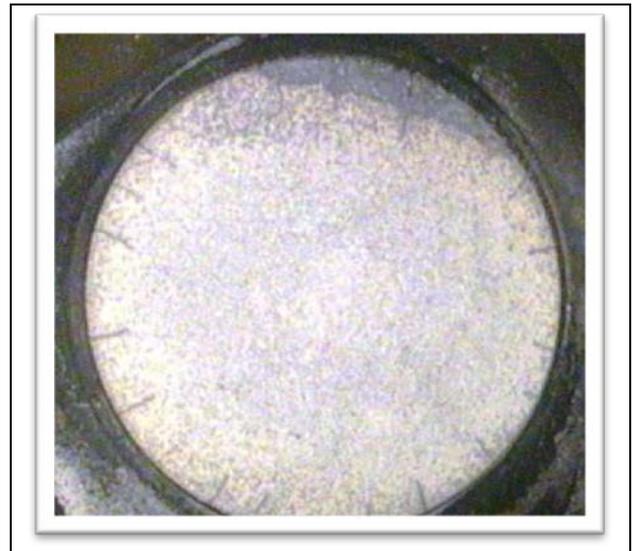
Endoscopy of the combustion chamber is revealing the MIG16 diagnosed damage: radial cracks on the exhaust valve of cylinder 2.
